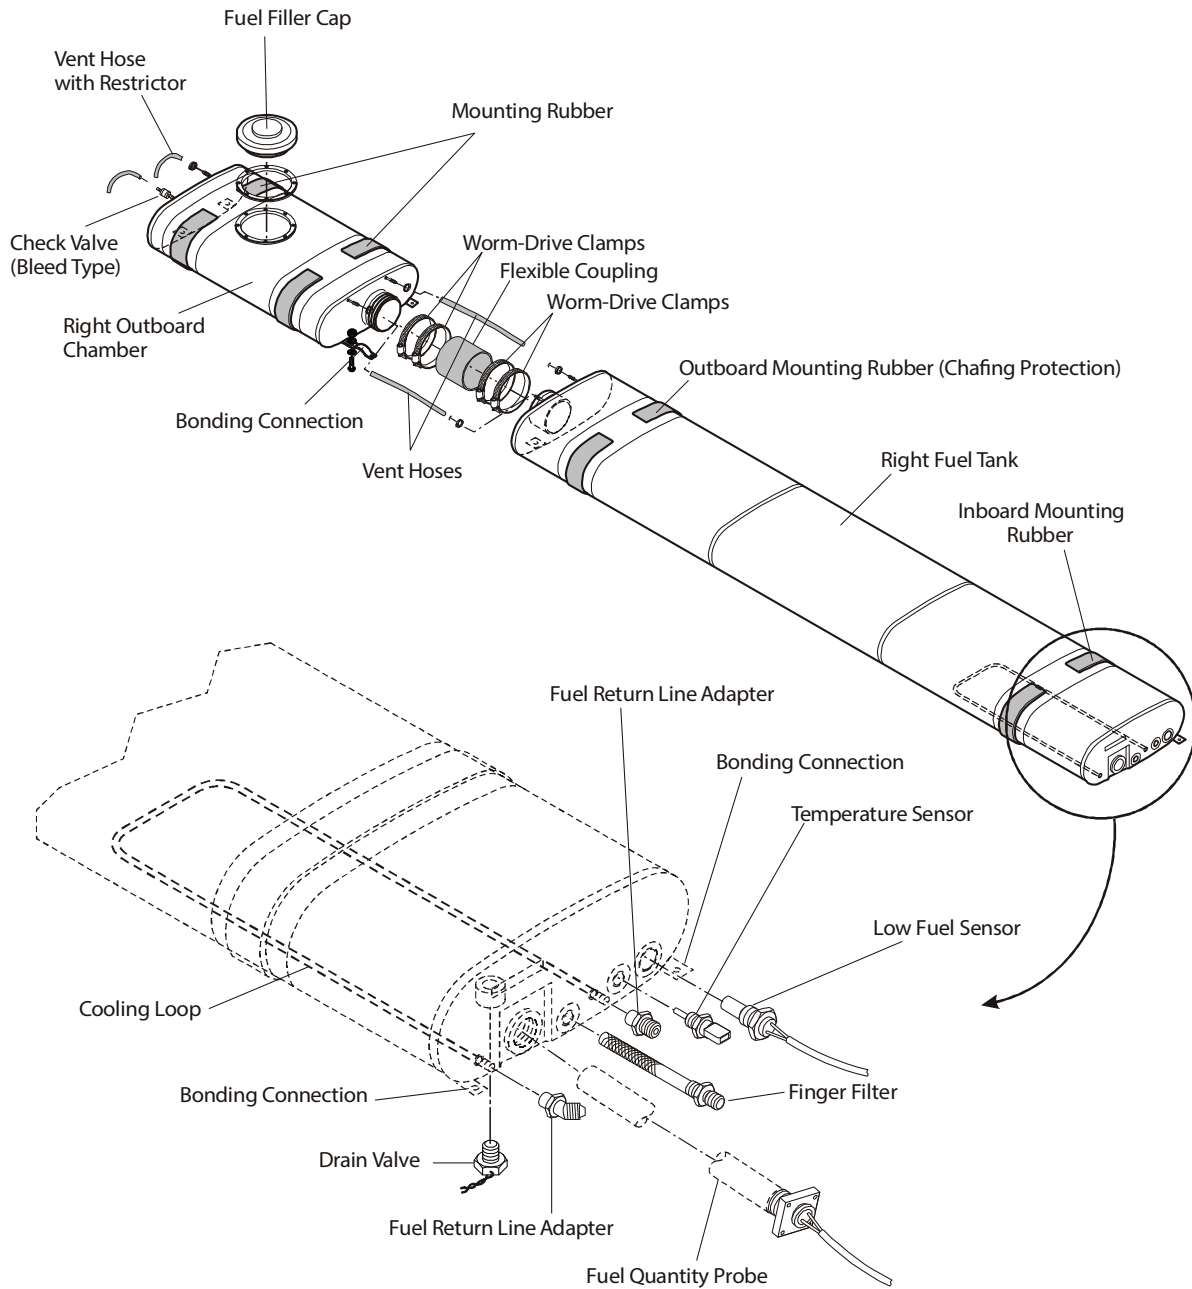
Right Hand Long Range Tank Installation (if OÄM 40-130 is installed)
